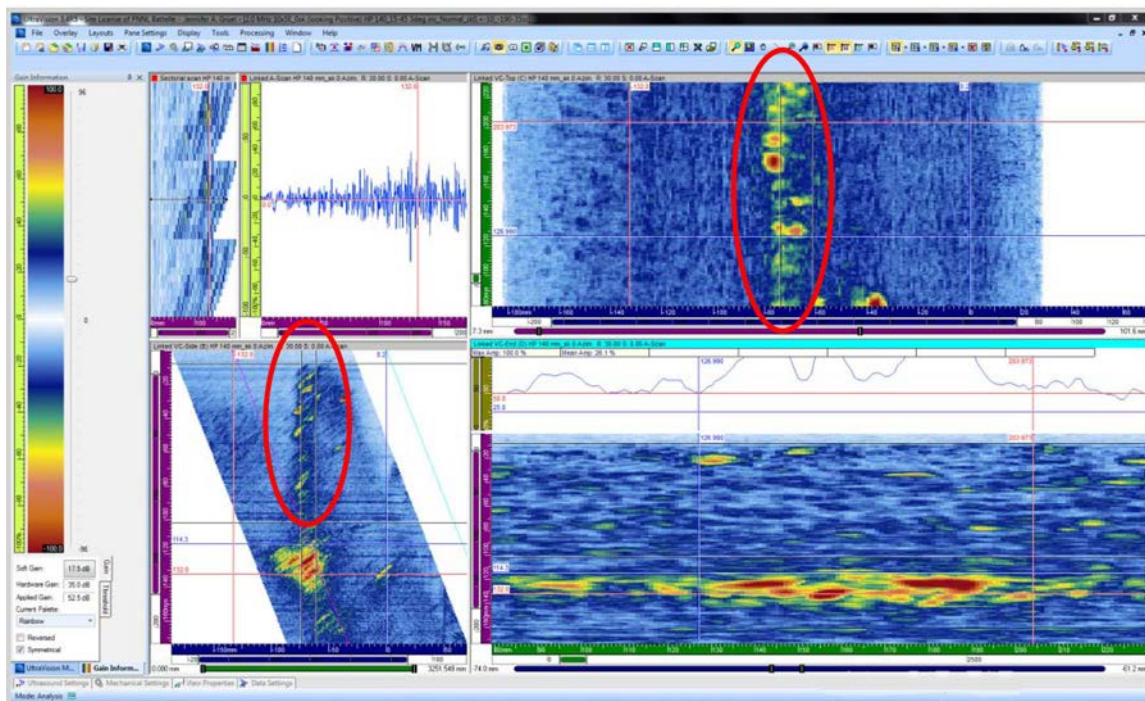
DM-10 CW Skew 10 View of Axial Flaw 3 Region (flaw not detected) with Weld Fabrication Flaws Circled in Red
